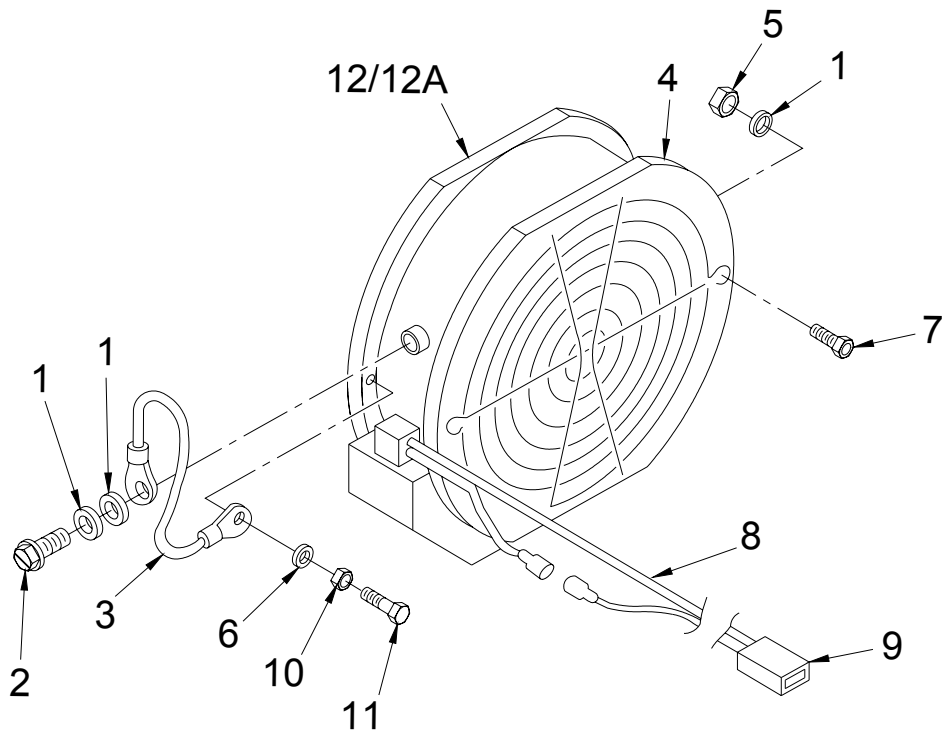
COOLING SYSTEM/COOLING FAN ASSEMBLY
